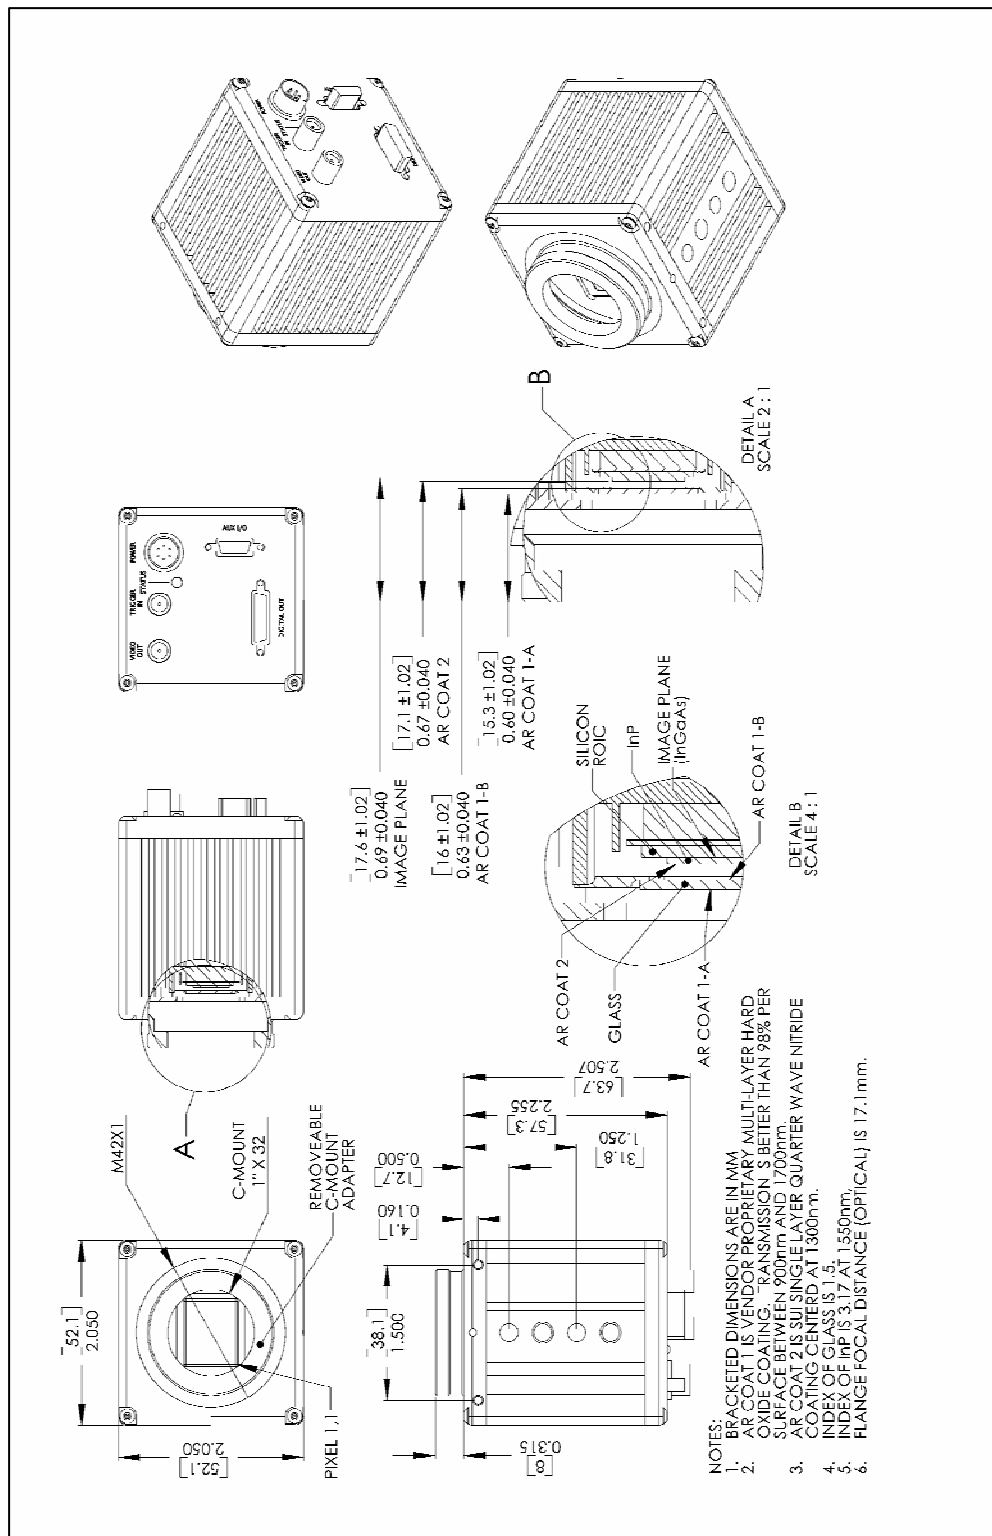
Mechanical drawing of camera body including optical path stack-up.
